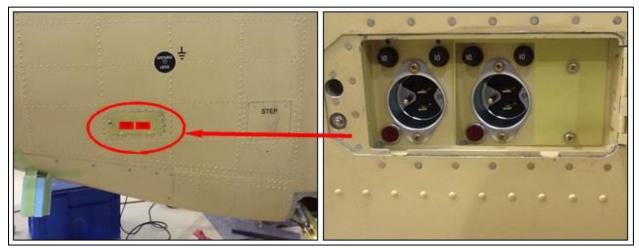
Shore Power Kit (door kit): p/n: TD02935, locate low on right side aft of rear inspection step (REF: STA 4960.0 WL 570.0) refer to drawing: 02929.
